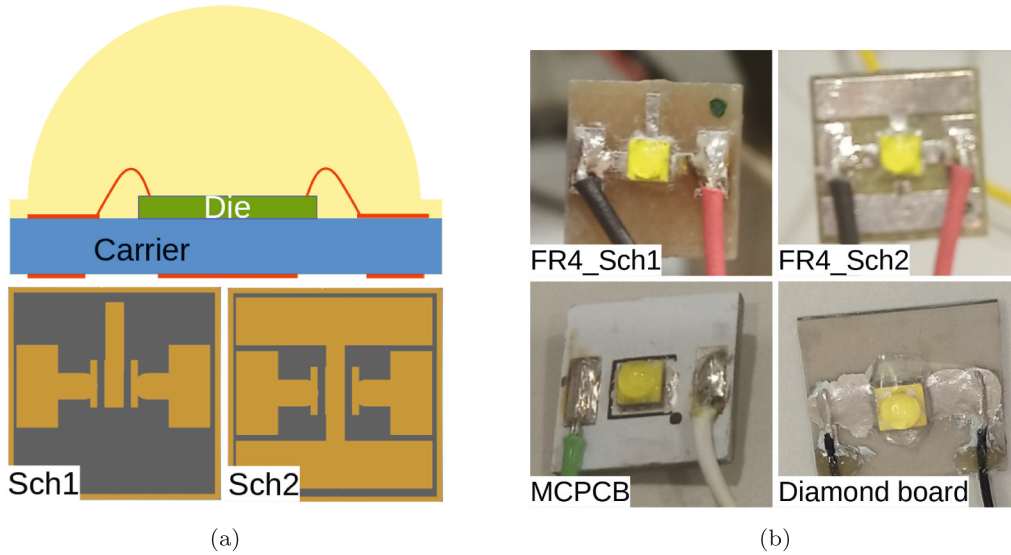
(a, top) LED cross-section view (drawing not to scale). (a, bottom) Electrodes layout. LEDs mounted on different boards: (b, top) FR4 boards (electrode layout Sch1 and Sch2) and (b, bottom) MCPCB/diamond boards (electrode layout Sch1).
